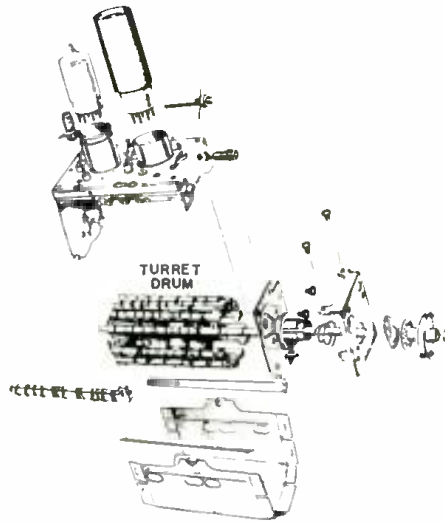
Exploded view of the newer and smaller turret tuner adapted by Admiral.
